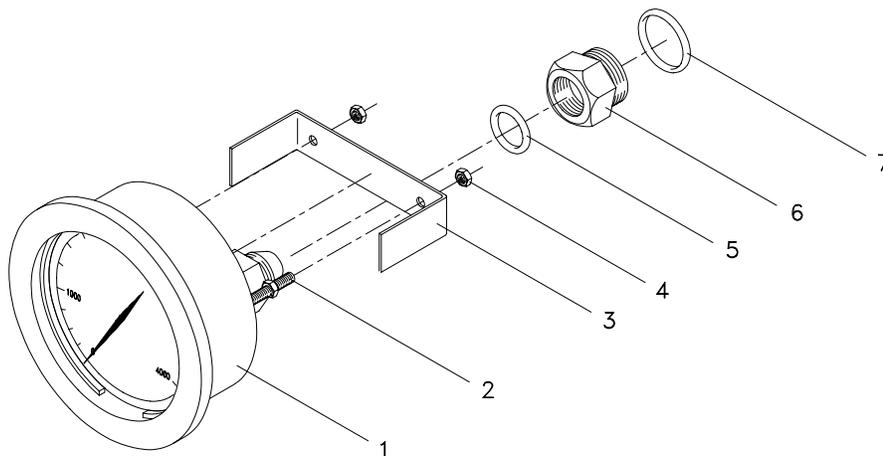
HP Pressure Gauges (AHP-G211, AHP-G316, AHP-G508, and AHP-G602)
